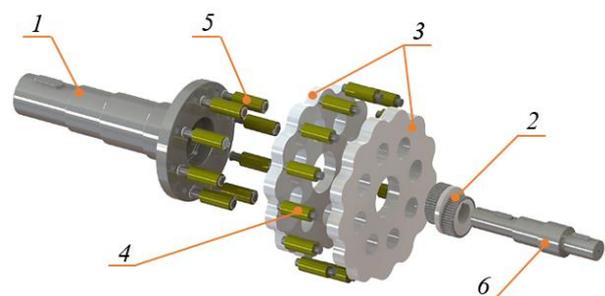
Single-stage cycloid reducer of the classic design (1 - input shaft, 2 - eccentric cam with needle bearings, 3 - cycloid disc, 4 - pins and rollers of the ring gear, 5 - output pins and rollers, 6 - output shaft)
